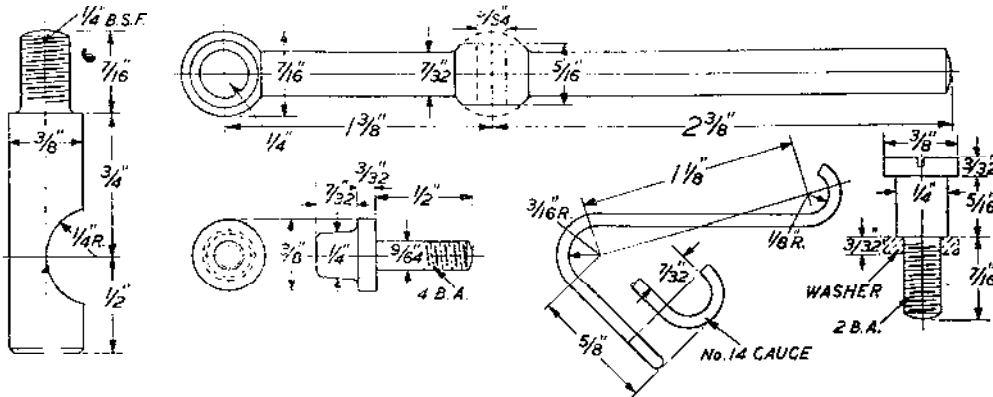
Details of tool holder drawbolt (six off), unlocking lever, locking pin, spring and pivot screw (1 off each).
